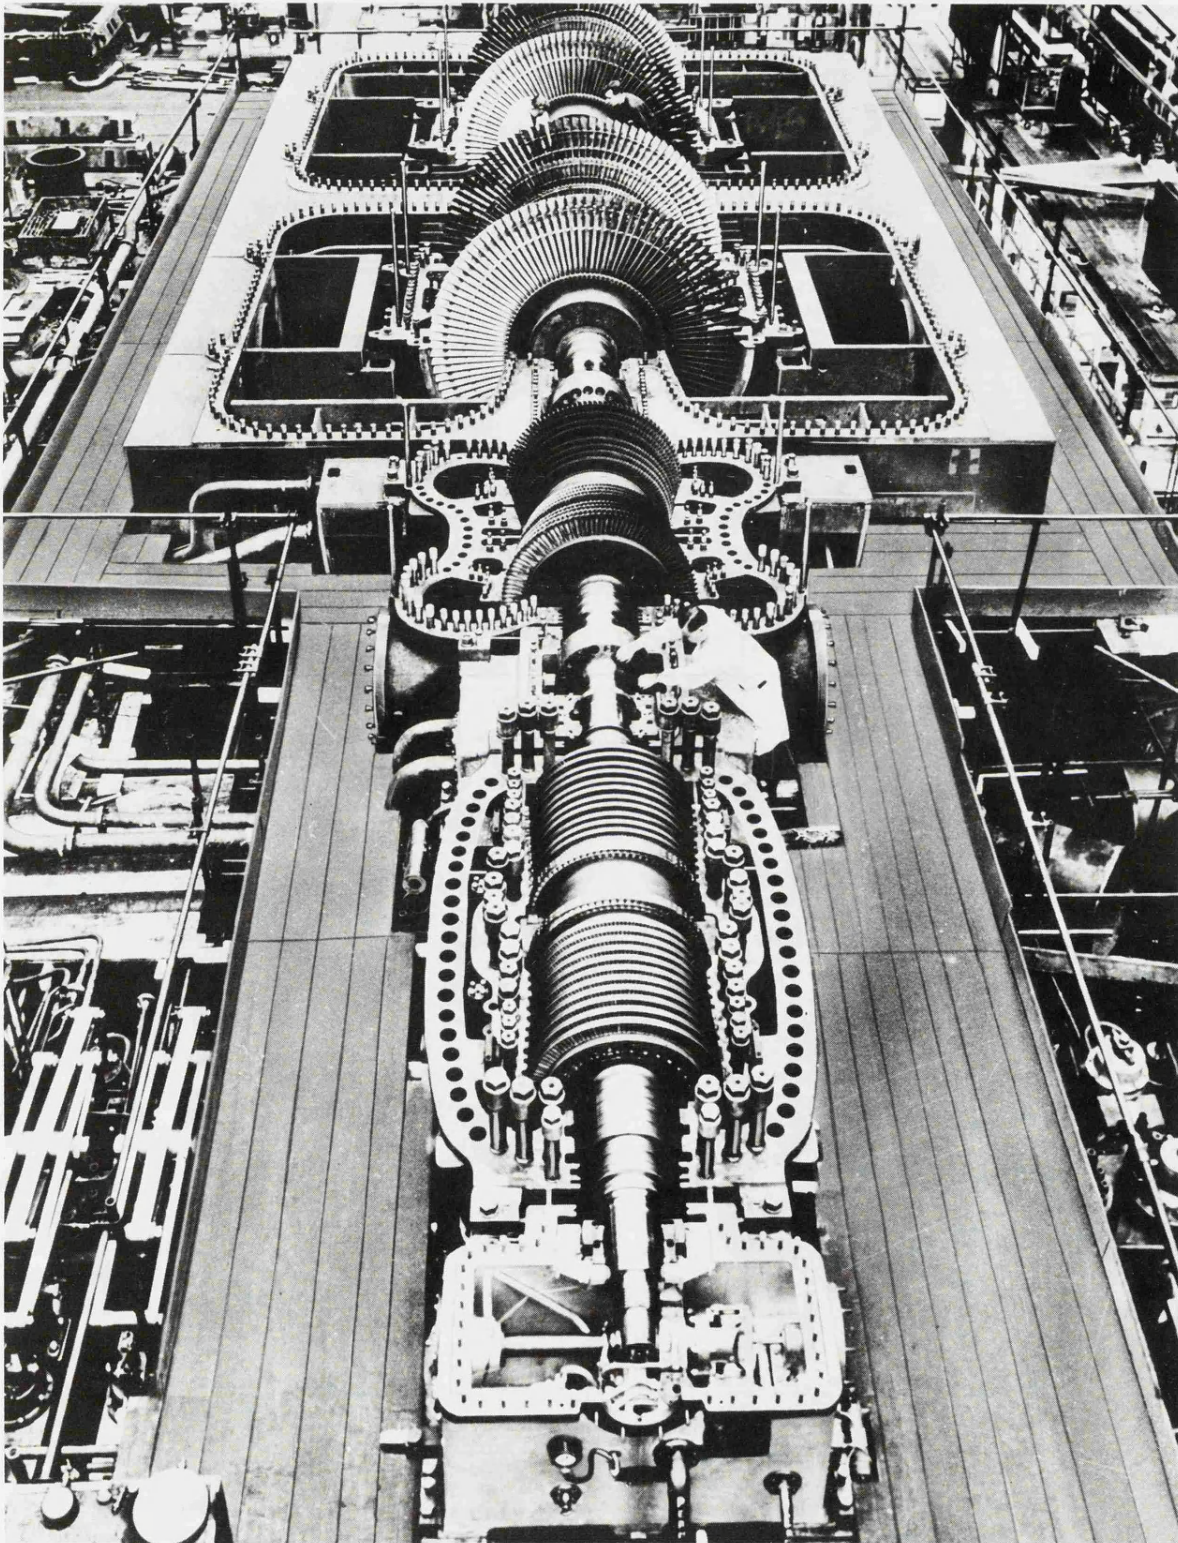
500 MW TURBINE ROTOR AND CASING
